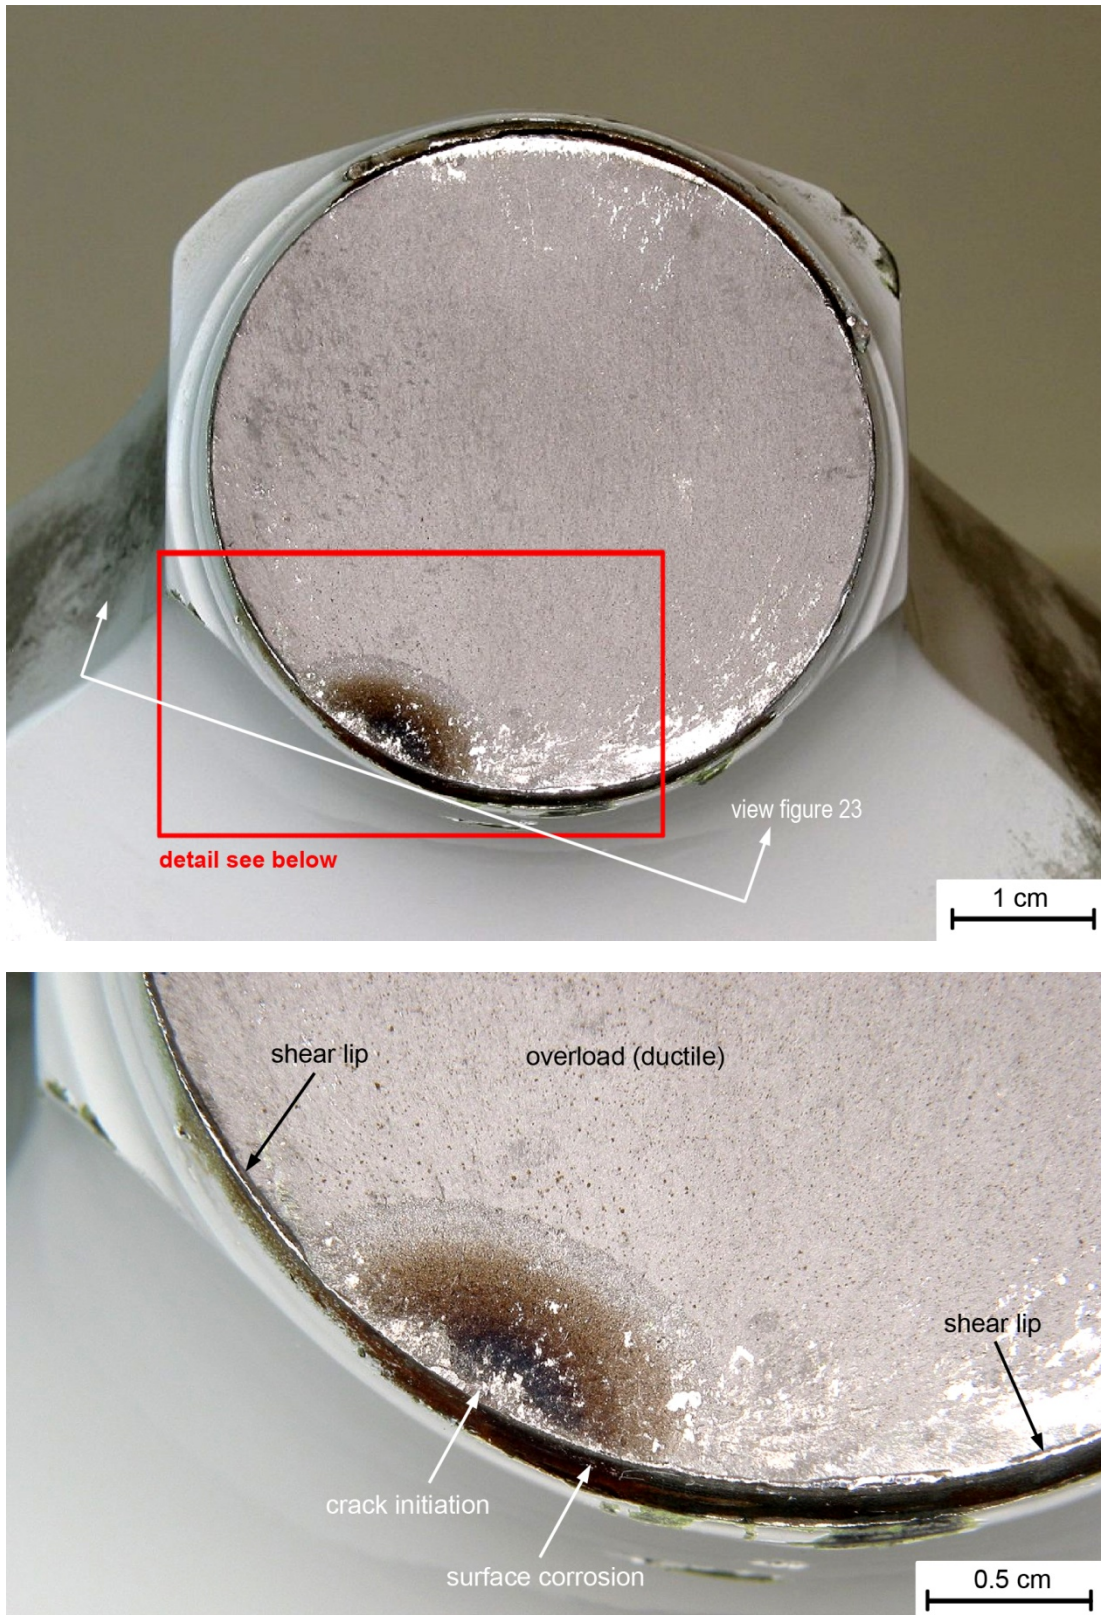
Case History 20.5.3 – Fork-Side Fracture Surface.
